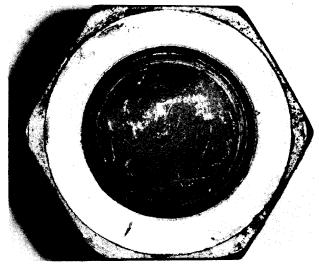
Bolt failure, fatigue, at first thread of nut.
